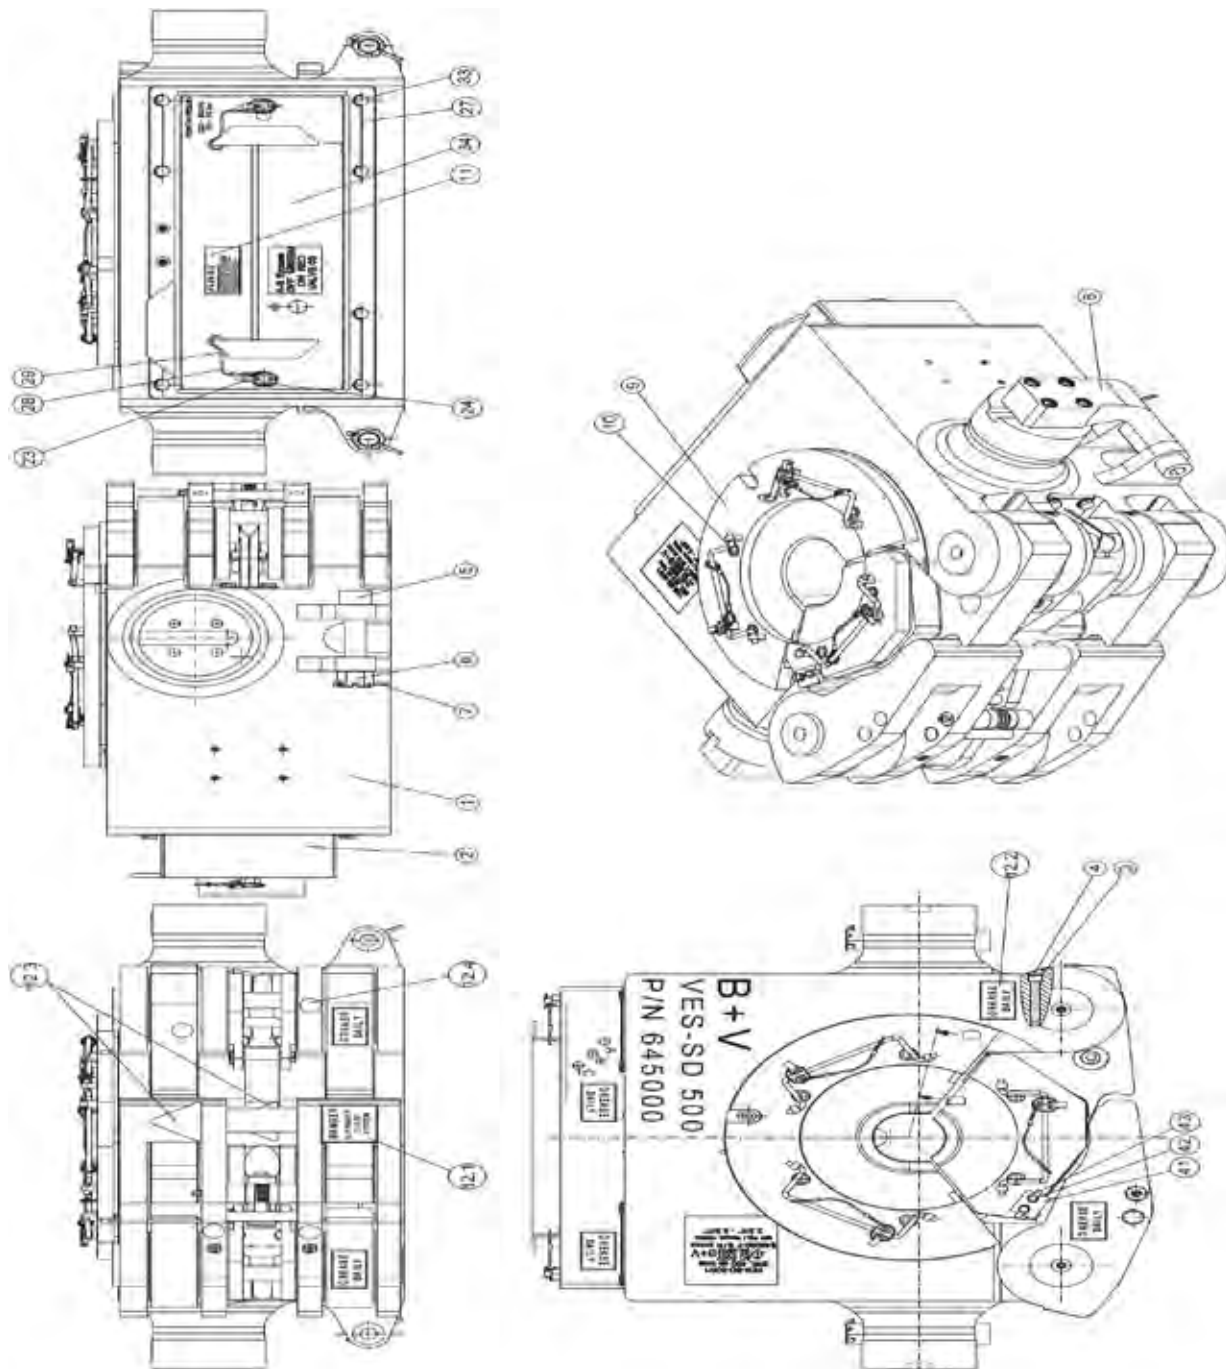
Drawing 646000-Y VES-SD 500-1 Page 1
